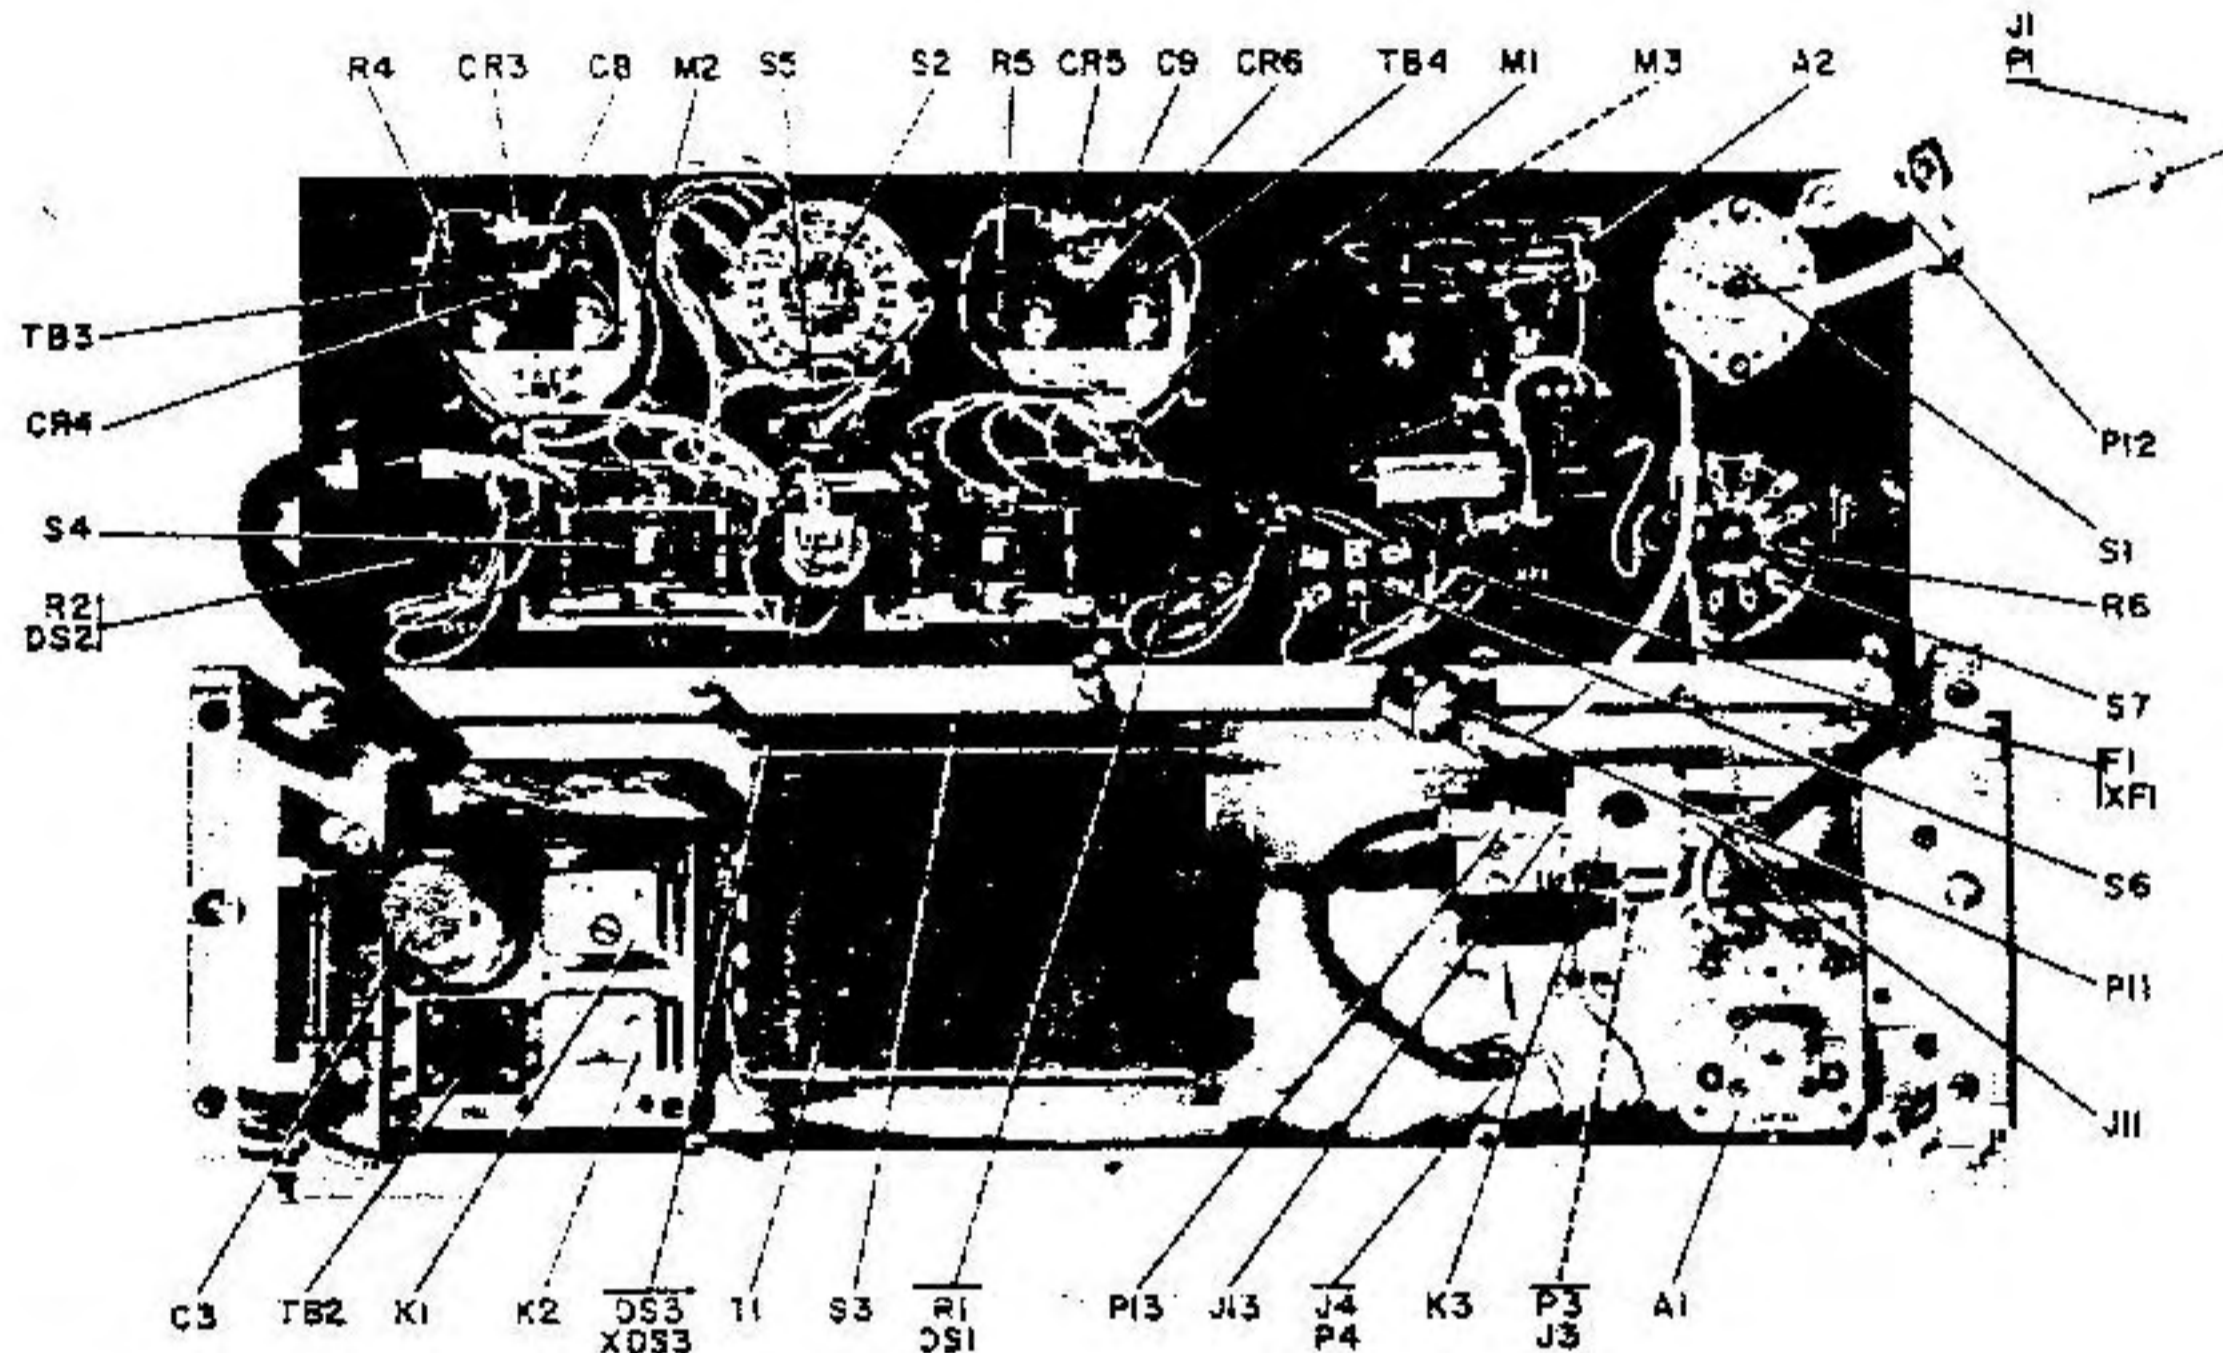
Coupler Control C-2698/SRA-22, Front Panel Removed
